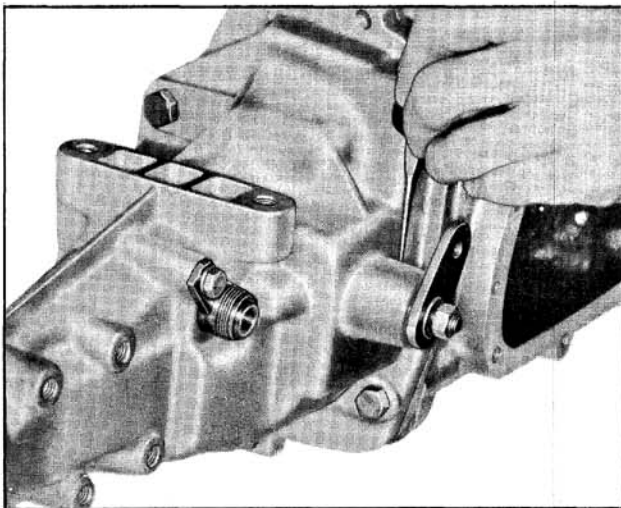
Removing Main Drive Gear Retaining Nut
